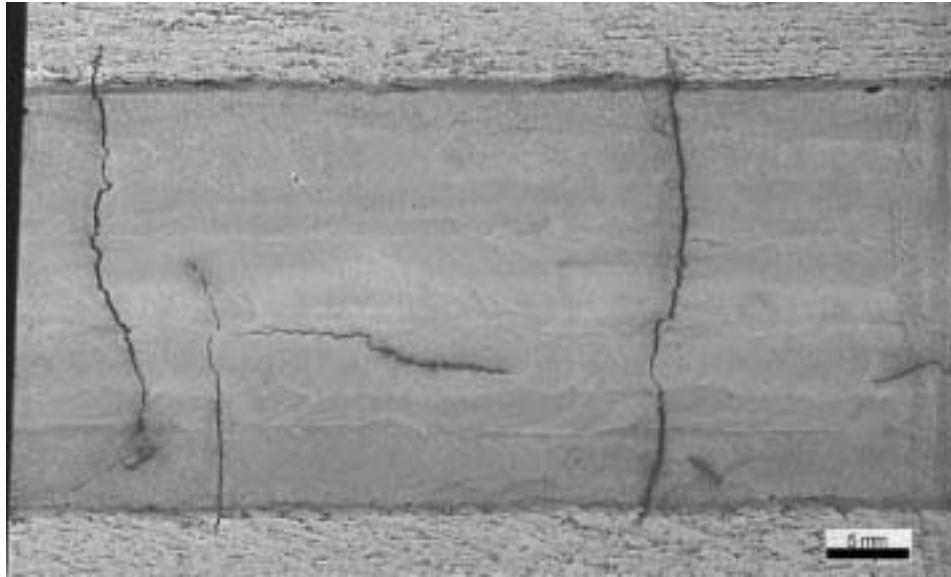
Longitudinal and Transverse Cracks Occurring in a Multipass Weldment
